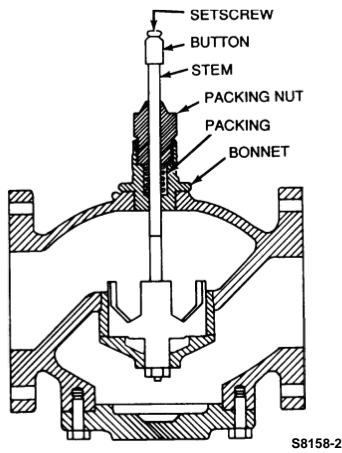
V5011B and E Reverse Acting Flanged Body Valve—Cutaway.
